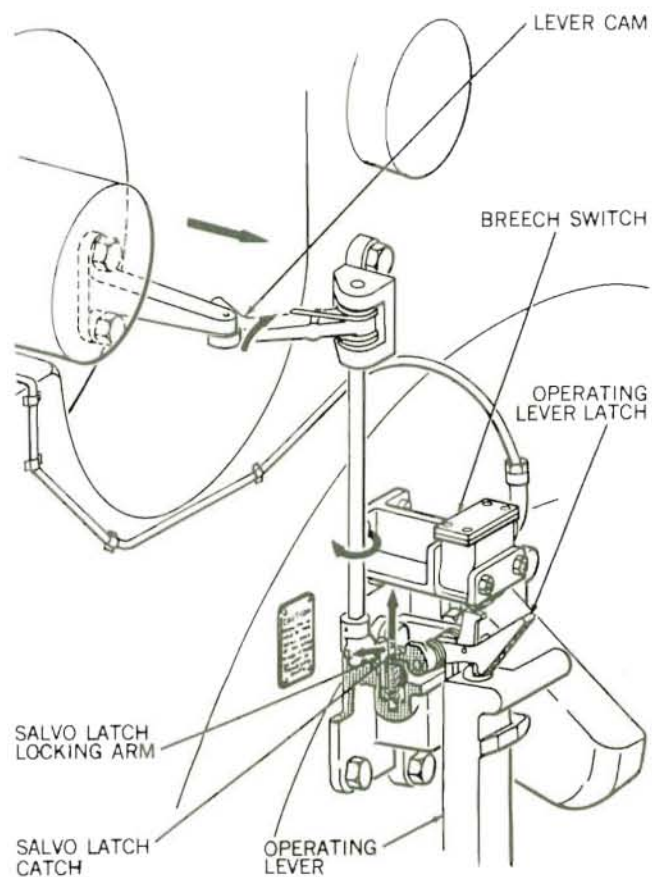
E. 16-inch Gun Assemblies. Salvo Latch Actuation. Gun Recoil.
